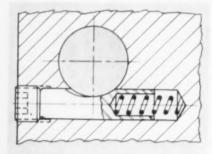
A spring is the only means of providing clamping pressure in this design.
